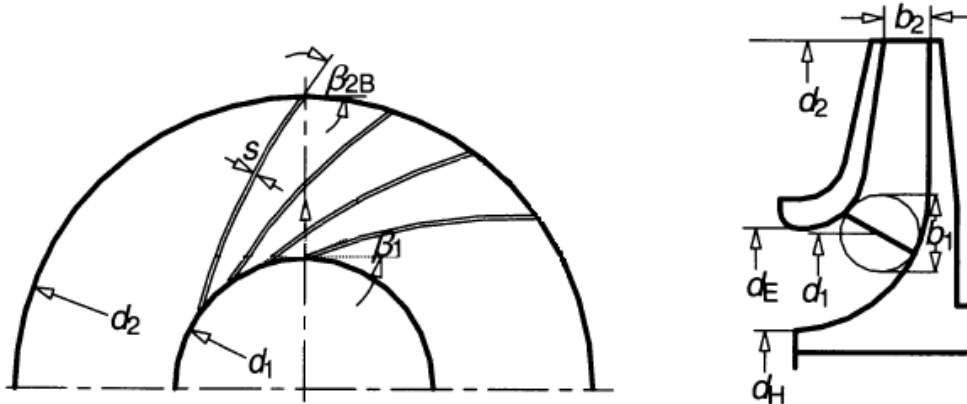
Impeller geometry. Subscripts: 1 blade leading edge midpoint, 2 blade trailing edge, E eye, H hub, B blade, b width [18].
